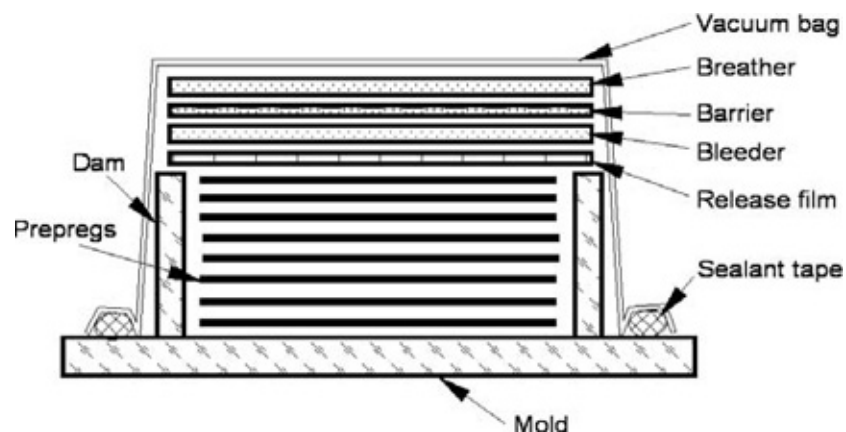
Vacuum Bagging Method for Prepreg Hand Lay-up Method [5]
